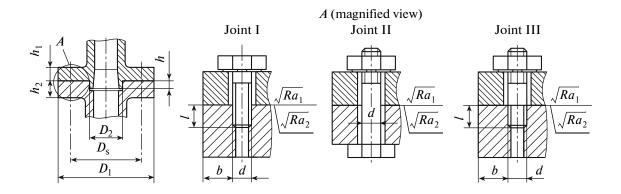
Threaded joints for the flanges of submersible centrifugal pumps: (I) screws; (II) bolts; (III) pins.
